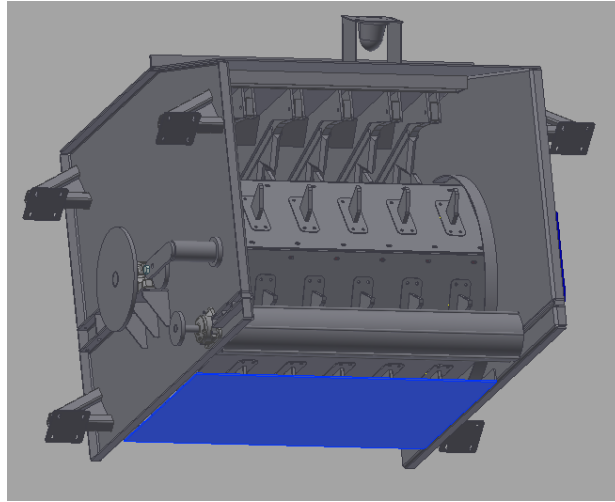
A bag tear and large-size waste shredding machine (bottom view with a hidden gear cover)
